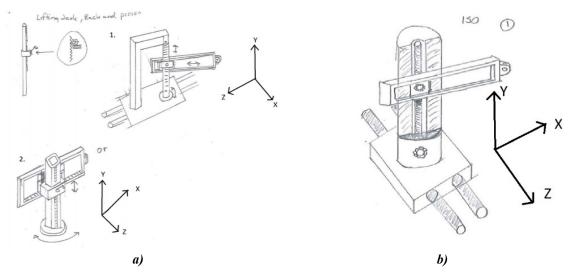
a) Two tower design using pinion and rack. b) Tower design using a trapezoidal screw.
